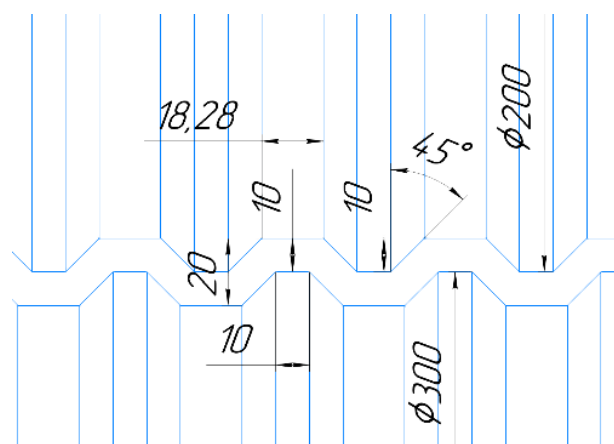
Design of relief rolls for rolling a 10 mm thick workpiece.
